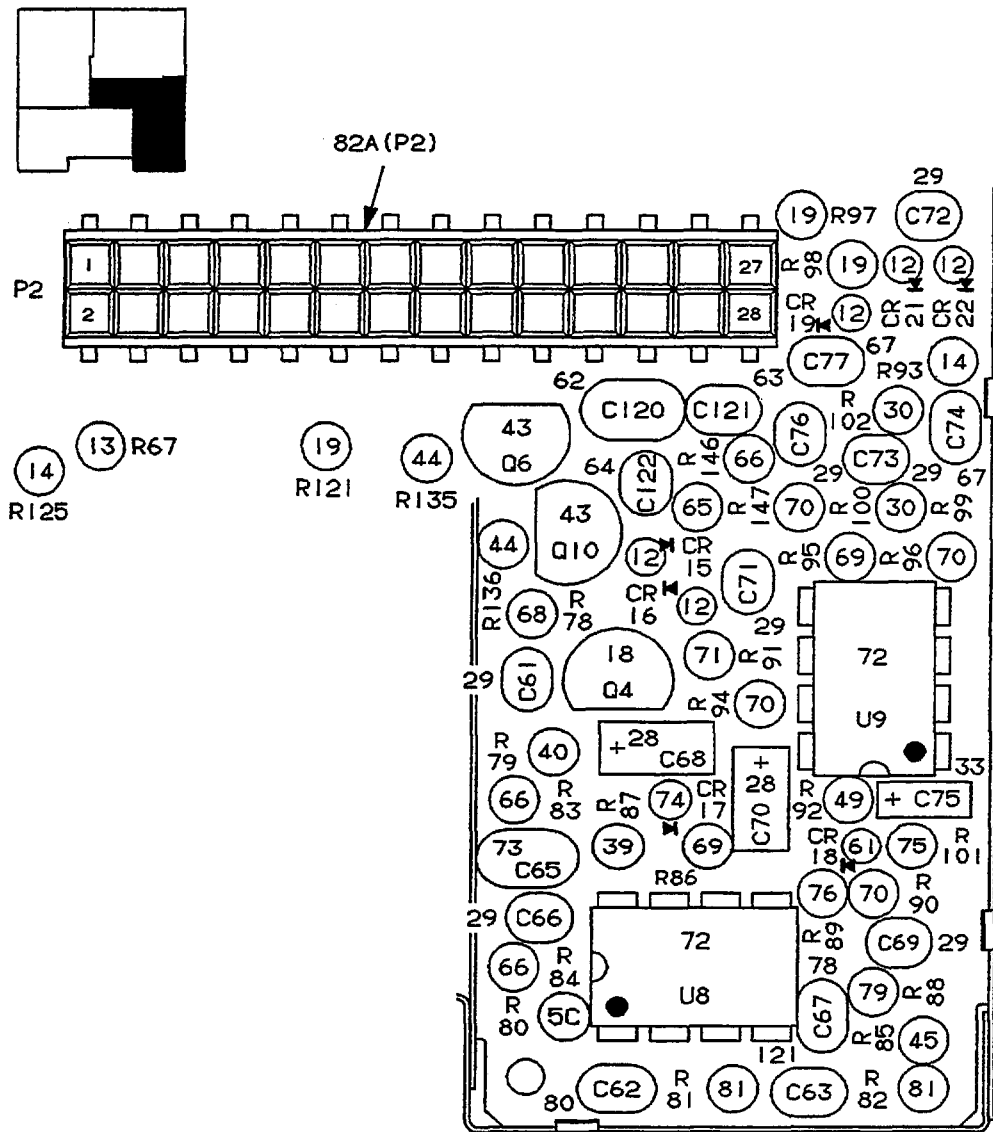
Synthesizer/AF Module Assembly (Sheet 3 of 5)
